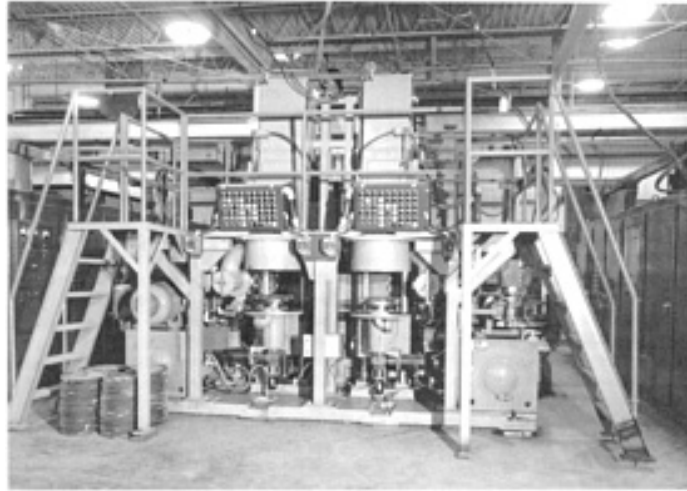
TWIN EBW-MV INSTALLATION DESIGNED TO WELD A RING GEAR ONTO A FLYWHEEL. COURTESY OF LEYBOLD-HERAEUS VACUUM SYSTEMS INC.
